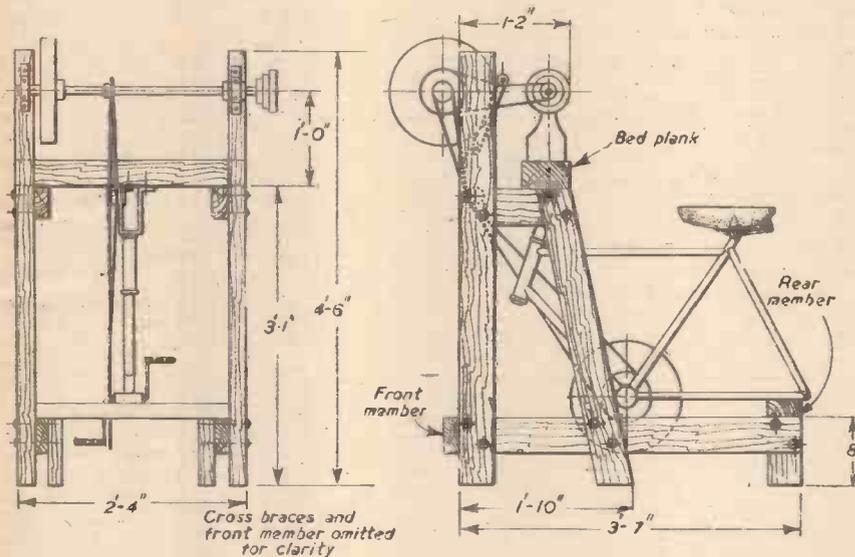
Rear and side elevations of the lathe stand and pedal driving gear:
